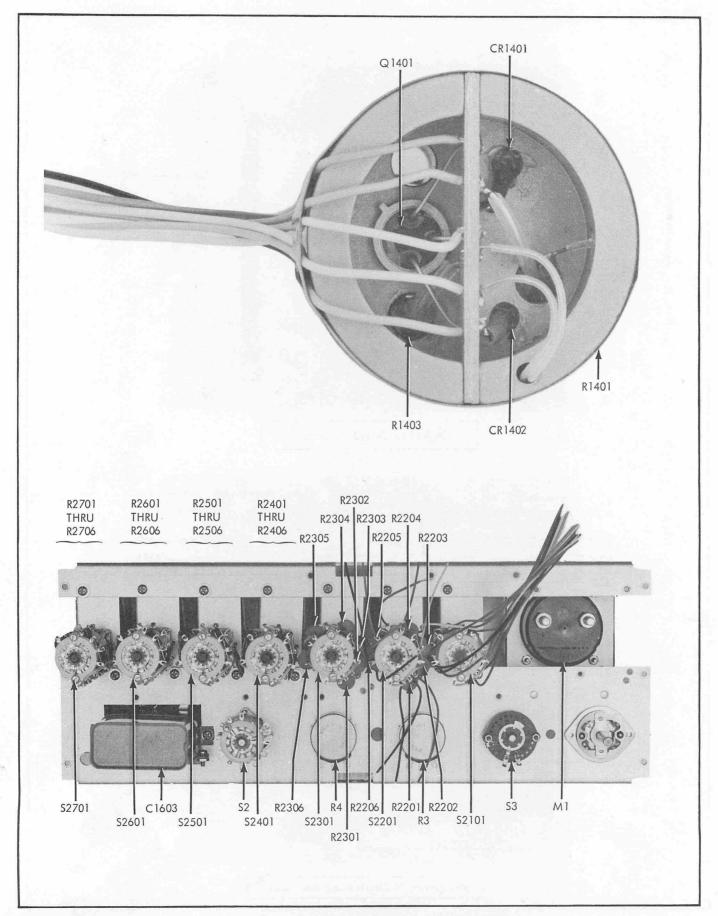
FRONT END ASSEMBLY (Sheet 3 of 4)
